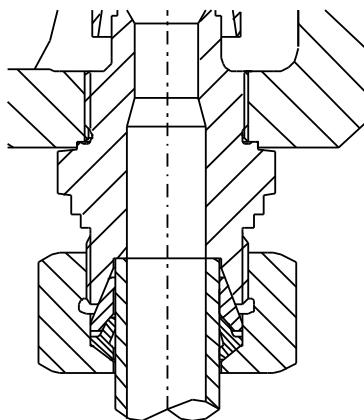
Swagelok compression fitting with double locking ring
